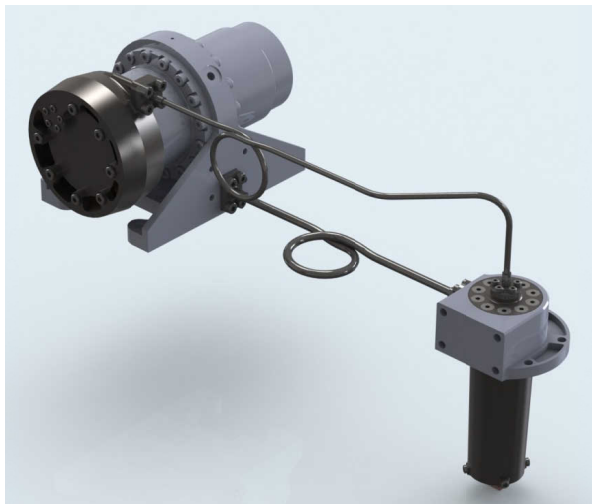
Complete 150K pulse tube cooler mechanical assembly.
